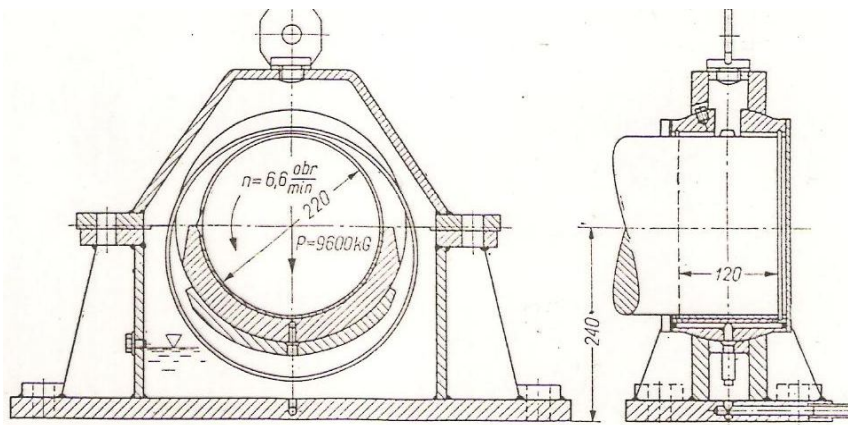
A fabricated housing bearing with a loose lubricating ring for a water turbine application. [10]
